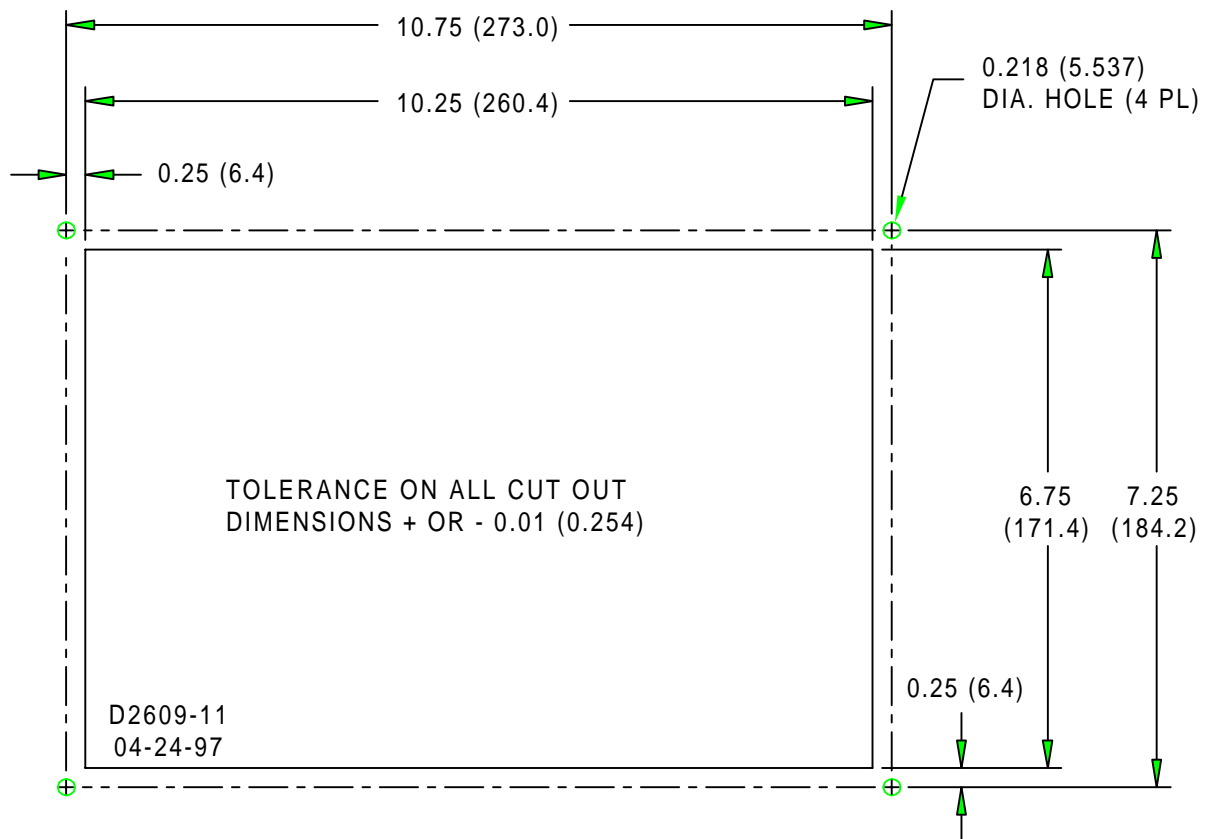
Cutout Dimensions In Inches (Millimeters)
